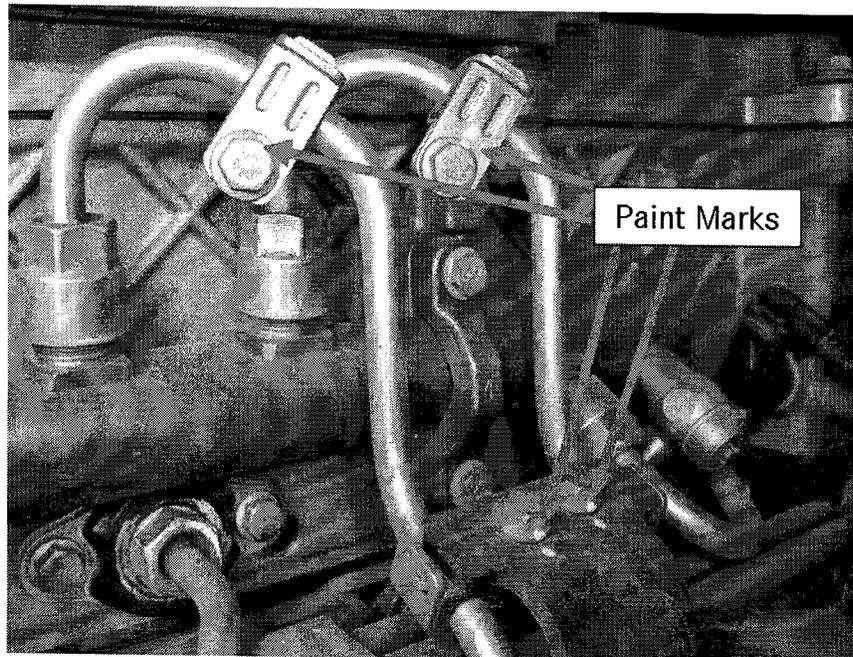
Paint Marks on Vibration Damper Bolts and High Pressure Fuel Feed Line P-Clip Bolts
